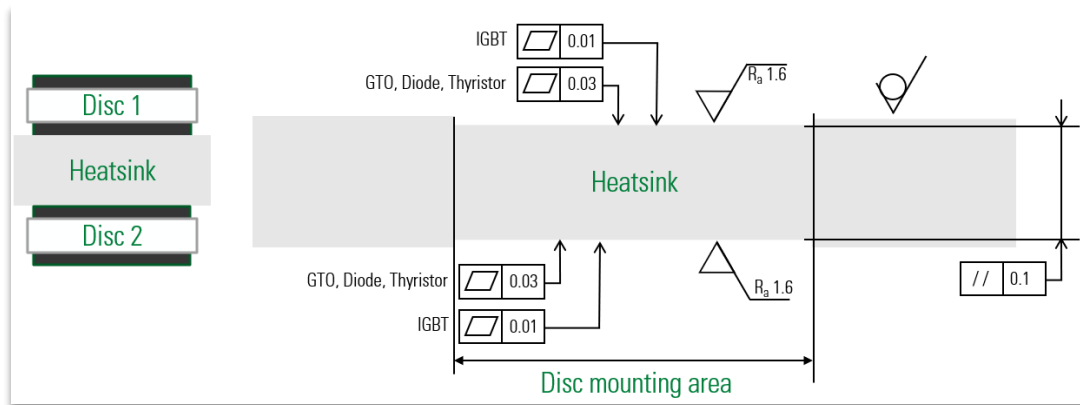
Contact Block Requirements When Discs are Mounted on Both Sides
